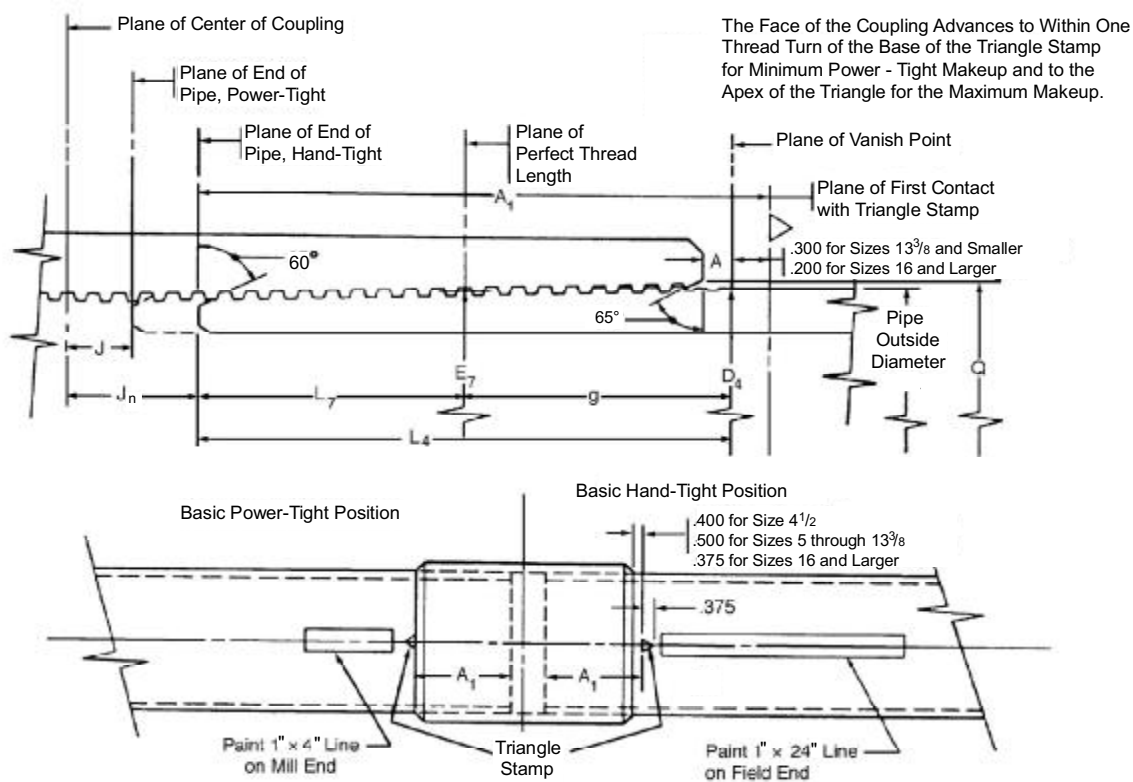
Basic Dimensions of Buttress Casing Threads Hand-Tight Make-Up
